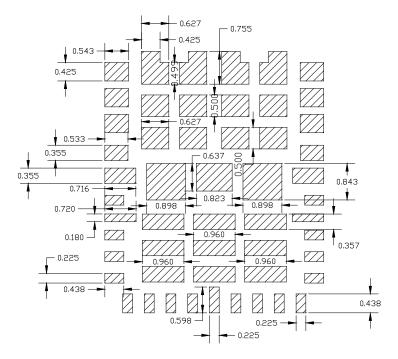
Stencil Pad Sizes (Dimensions in mm)
